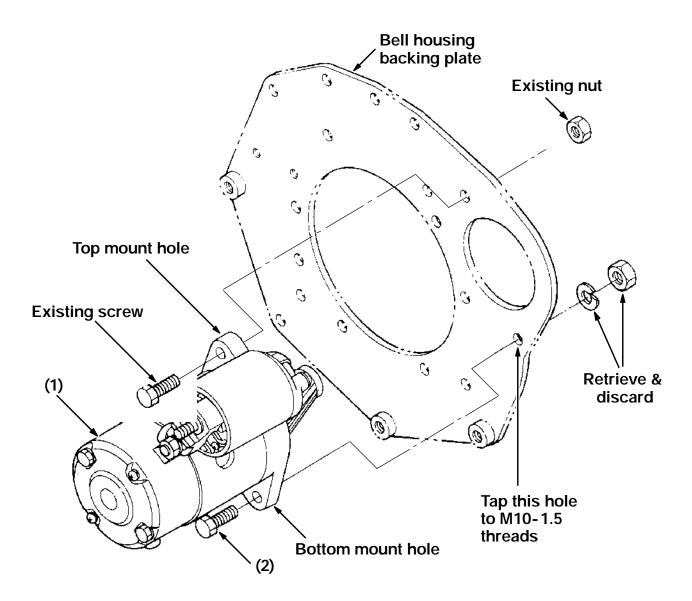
Replacement of Starter Assembly on Model 6400 Liquid-Cooled Gas and LPG Machines
